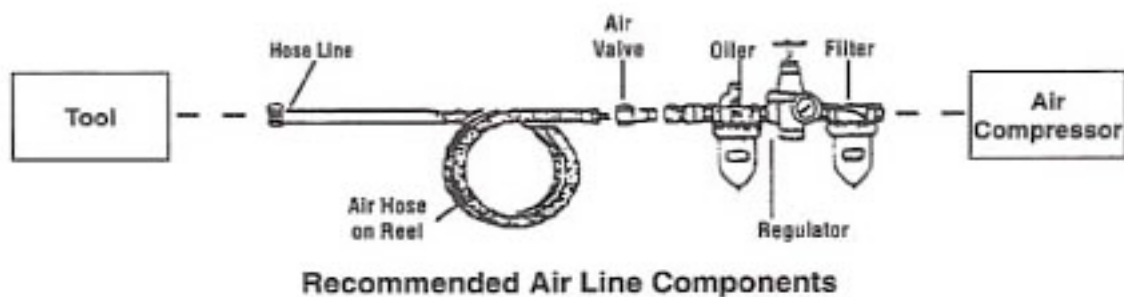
(Above) shows an optimal set-up that includes an inline filter, regulator and oiler. All of these components are sold separately.
